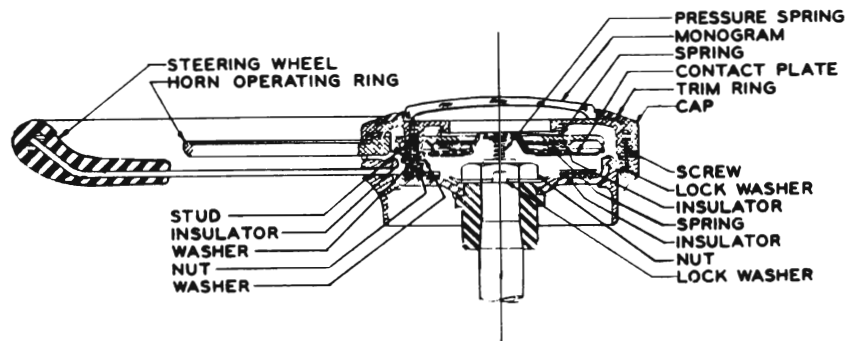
Horn Button—Flexible Spoke Wheel
